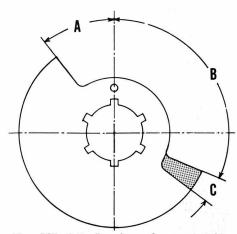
Drawing of rotary valve showing shaded area to be removed from opening end. Angle (A) is 35 degrees, angle (B) is 115 degrees and angle (C) to be removed is 11.5 degrees.
